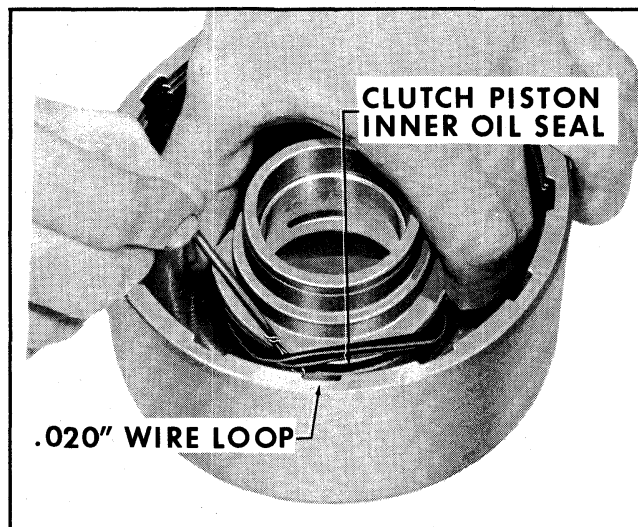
B-80 Installing Clutch Piston Inner Oil Seal
